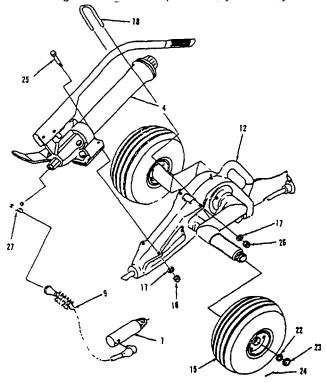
Ground Handling Wheels Assembly, Model 1730-EG-100
